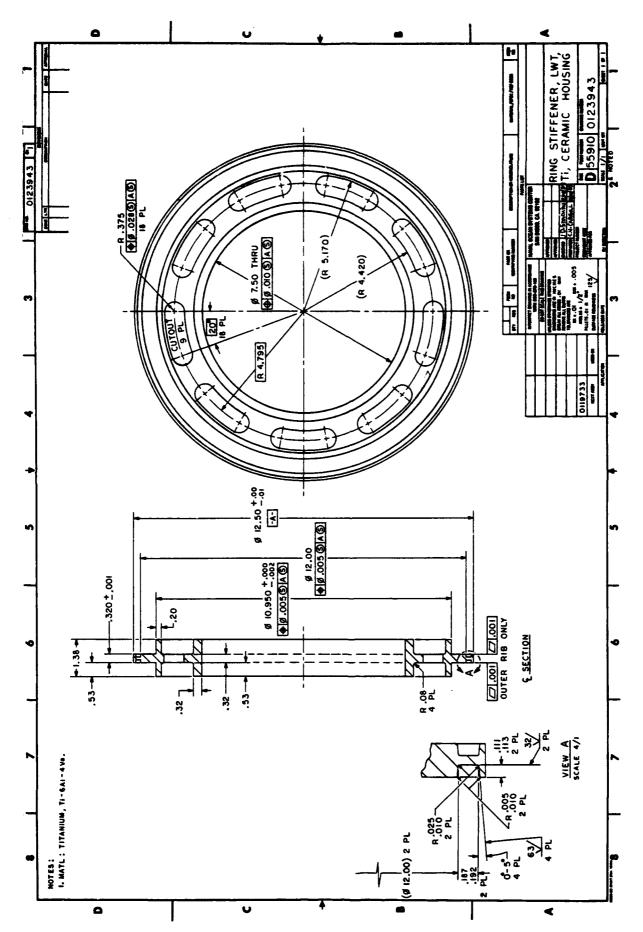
Titanium ring stiffener DWG 0123943; fabrication drawing.
